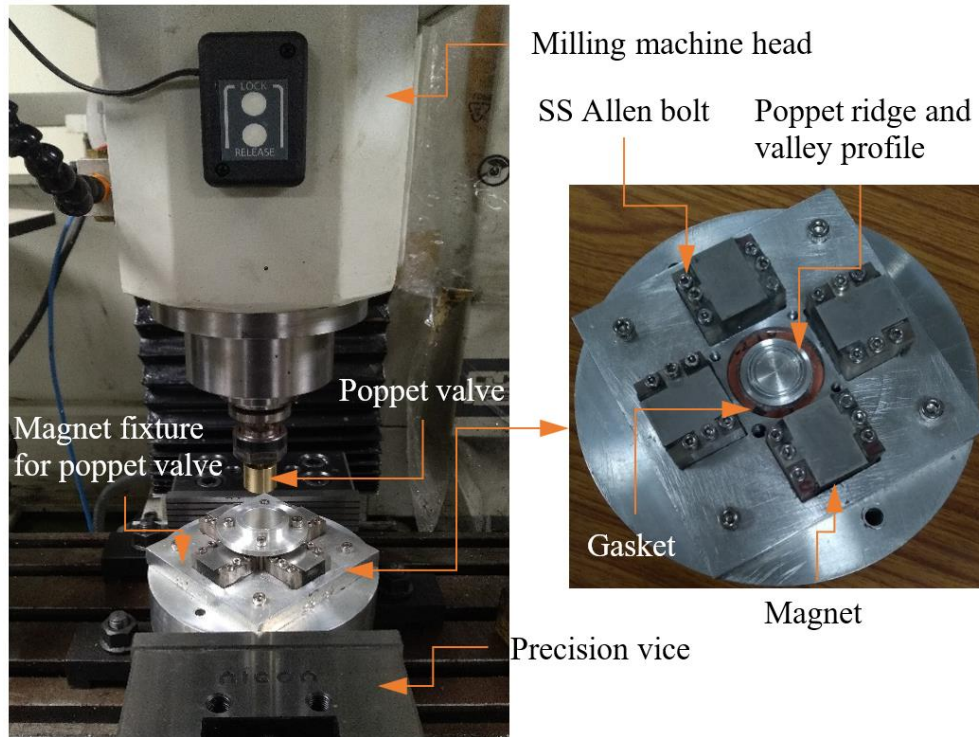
Experimental setup for poppet valve finishing with magnet fixture details
